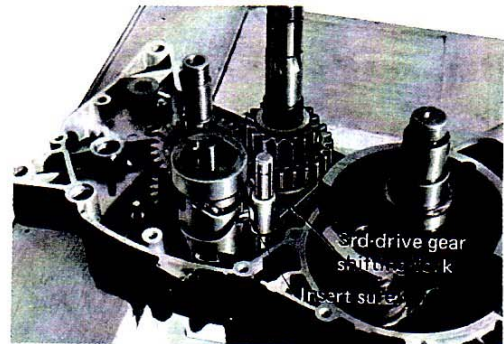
Inserting shifting fork into the fourth and fifth drive gear
